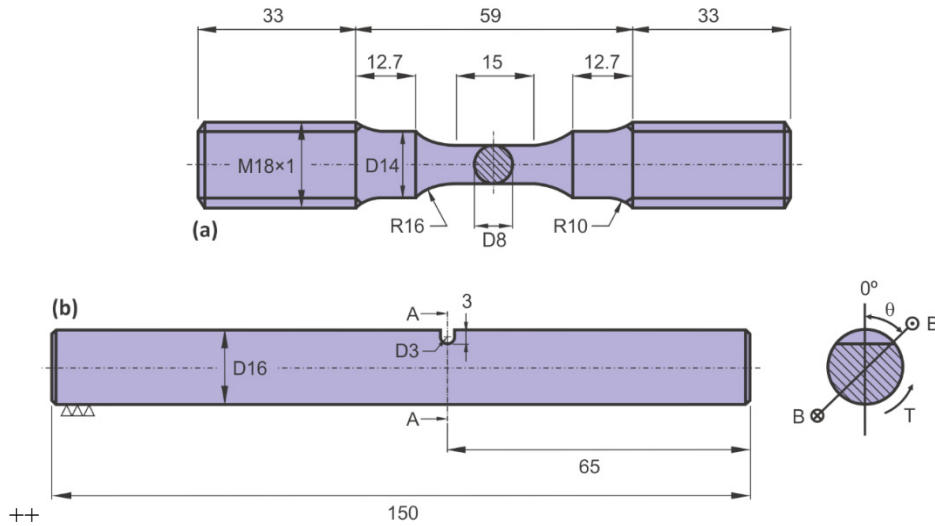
Specimen geometries: (a) low-cycle fatigue tests; and (b) multiaxial bending-torsion fatigue tests (unit: mm).
